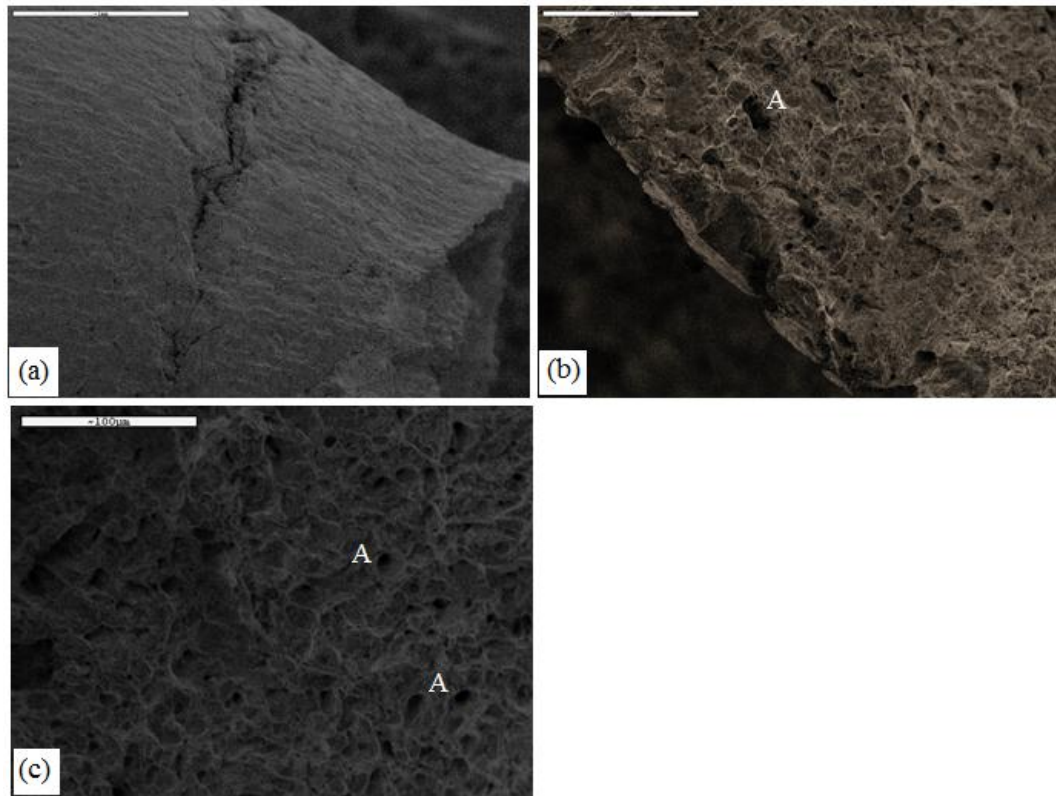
Fracture surface as viewed by SEM. (a) Crack morphology, (b) edge of fracture surface and (c) centre of fracture surface.
